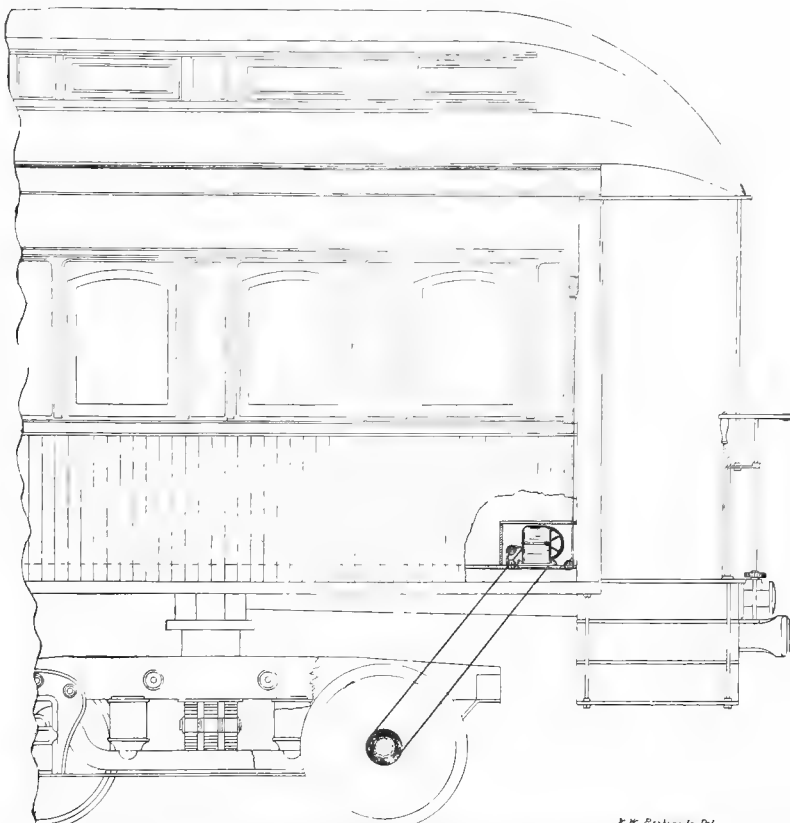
Boyer Speed Recorder Applied to Car. Chicago Pneumatic Tool Company.
